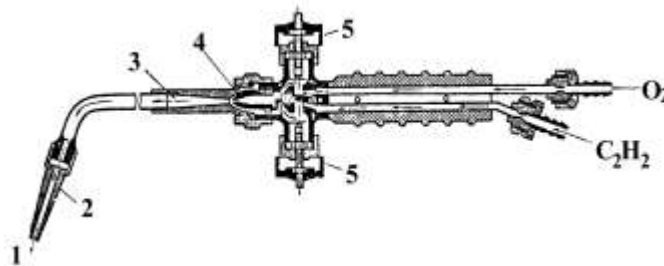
Gas welding torch: 1 – fuel mixture; 2 – tip; 3 – mixture chamber; 4 – injector; 5 – valves
